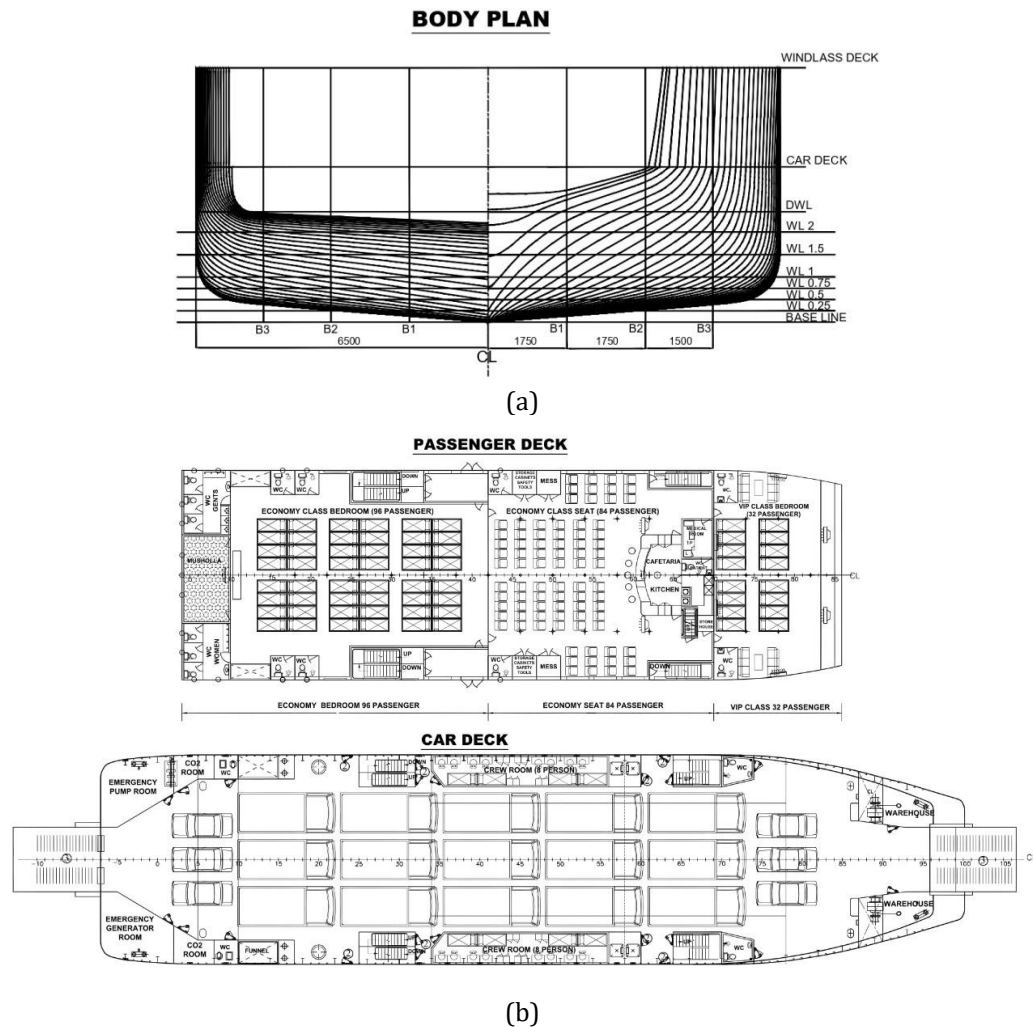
Design information of the ship: (a) Body plan; (b) Deck layout
